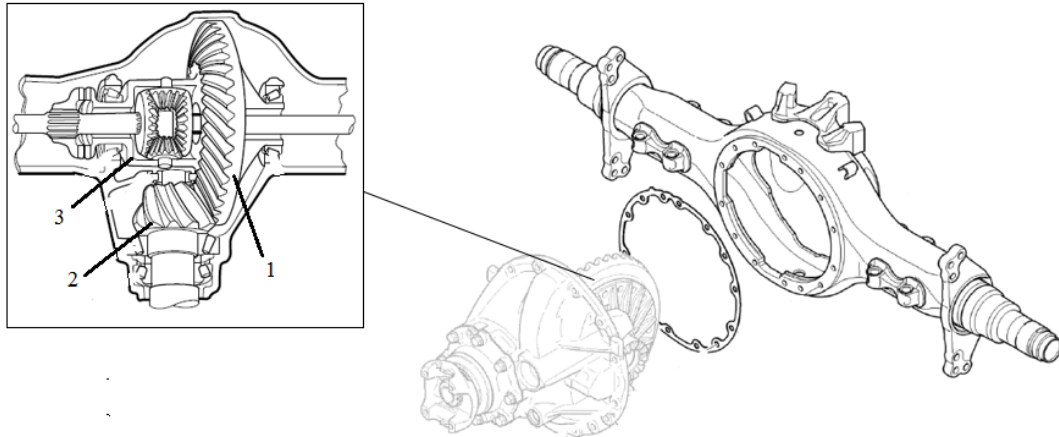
Rear axle gear, with main components: crown wheel (1), pinion (2) and axle differential (3).
